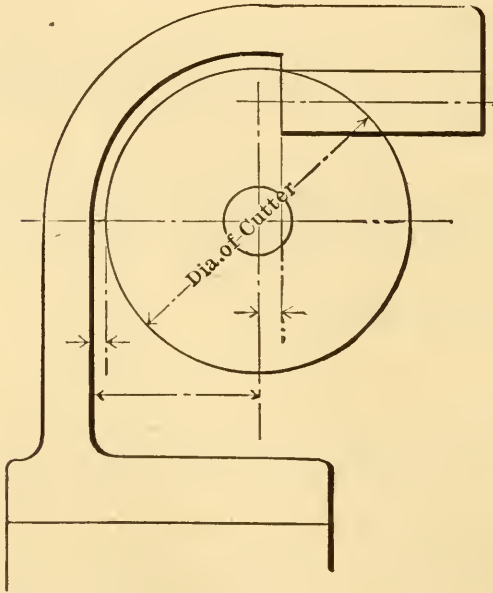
CUTTING INTERNAL GEAR WITH ROTARY CUTTER.
